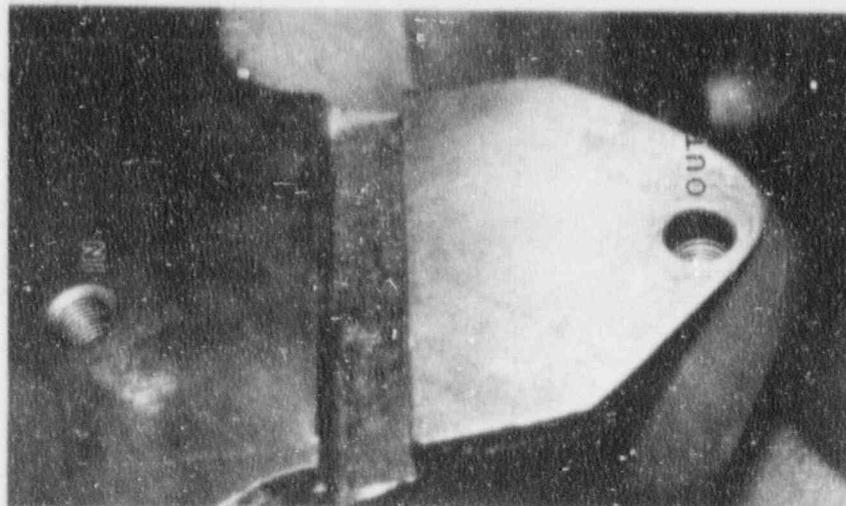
View of engine block left top deck at the location of camshaft bearing block number 2. Note, the threads of the inboard bolt hole are basically intact while approximately 5 threads of the outboard bolt hole are stripped. The inboard bolt was found to be the correct length while the outboard bolt was found to be short.
